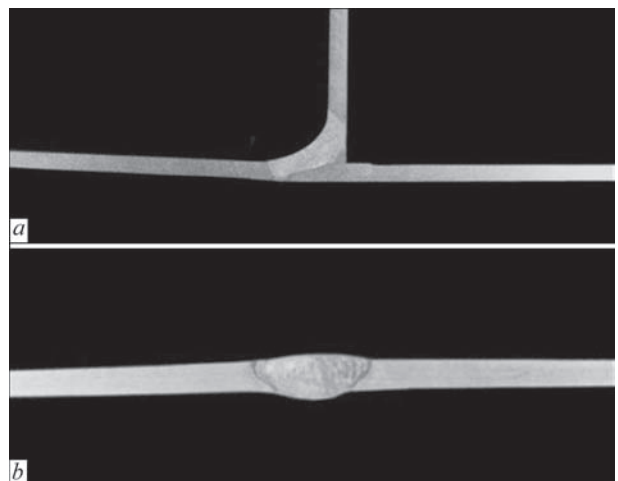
Macrostructure of T-joint (a) and butt joint (b) of 1.5 mm thickness, made by the TOPTIG method using welding parameters according to the Table
